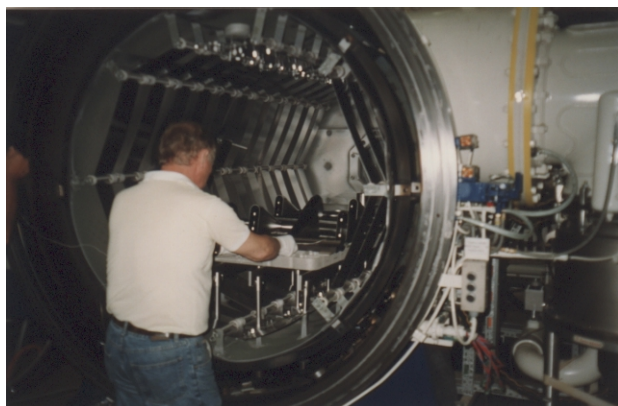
Annealing of the internal parts of SRFQ2 in the DESY HV-furnace, prior to their welding to the Nb tank.
